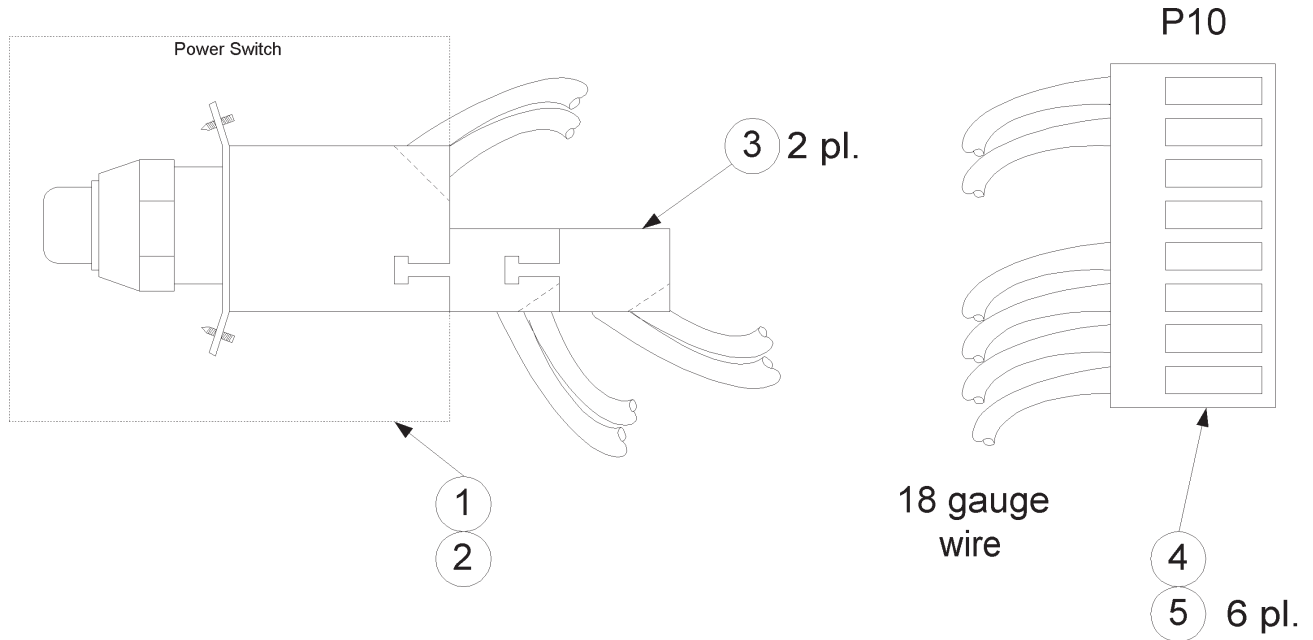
CONTROL PENDANT EXPLODED VIEW
